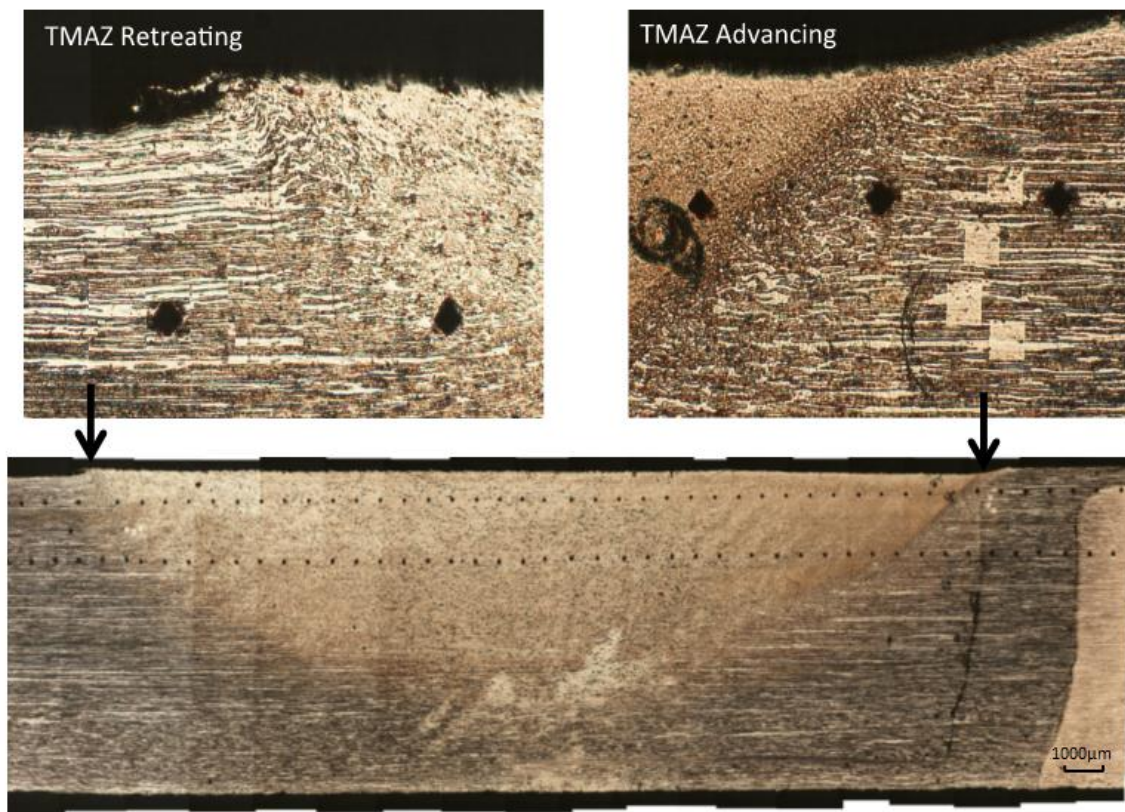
Welded section of 350 rpm FSW HT9. Advancing and retreating sides are clearly depicted.
